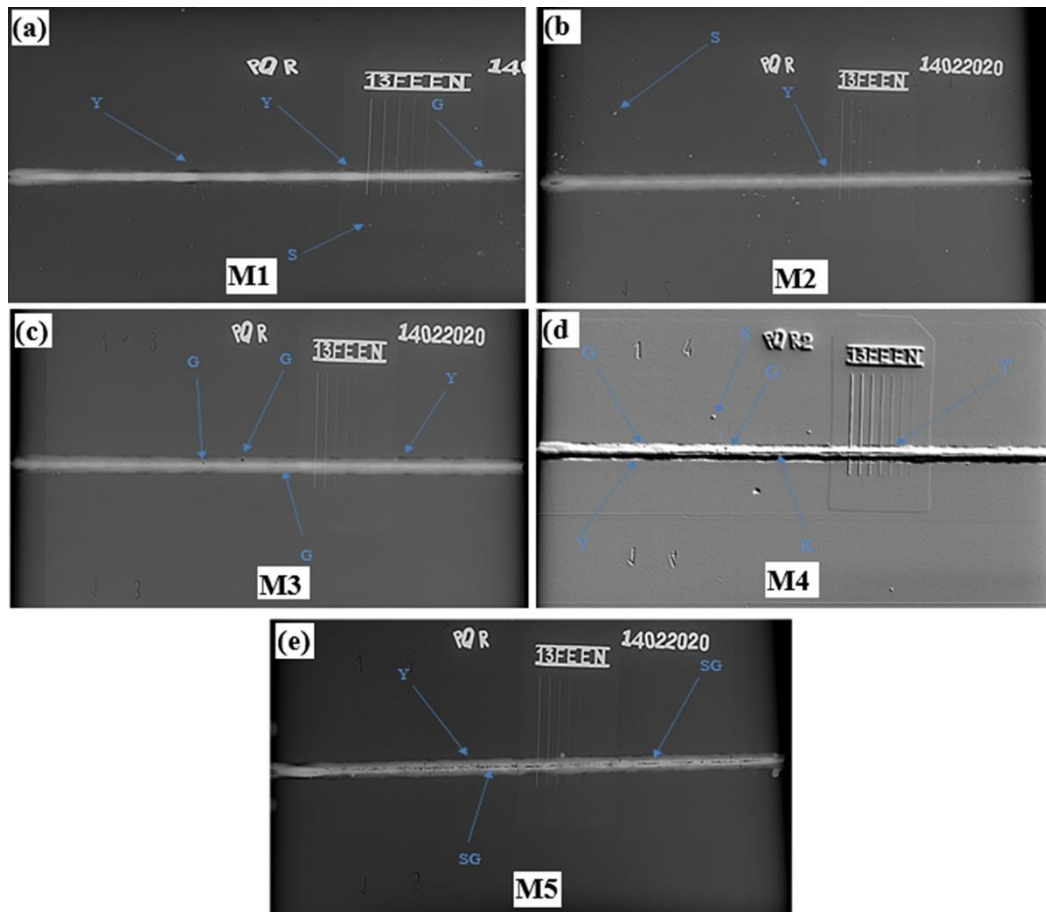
Radiographic photographs of welded samples joined by MAG welding method a) M1, b) M2, c) M3, d) M4 and e) M5
